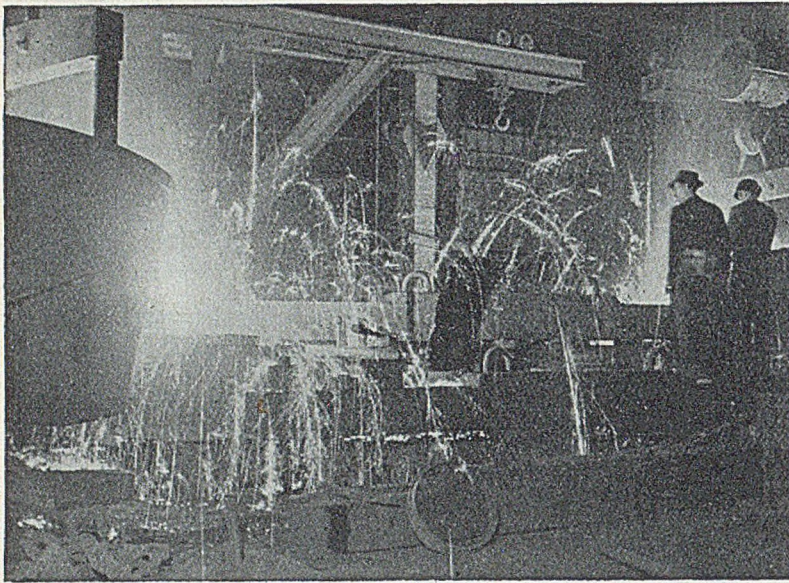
Casting a 30-ton Gear-wheel, the Photograph was taken by a Junior Member of the Staff.
